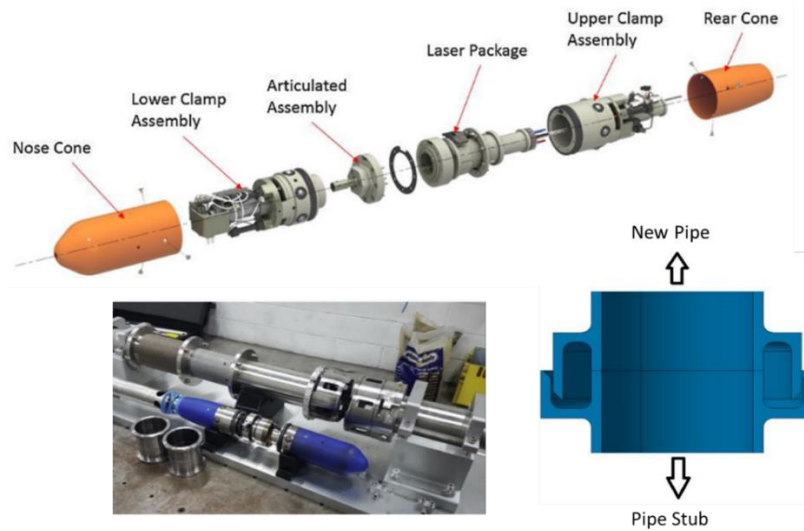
DEMO welding tool design concept and the pipe alignment features [8], [9]
